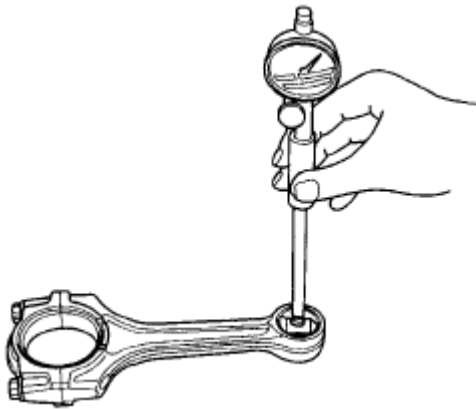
Checking Piston Pin-To-Piston Clearance
